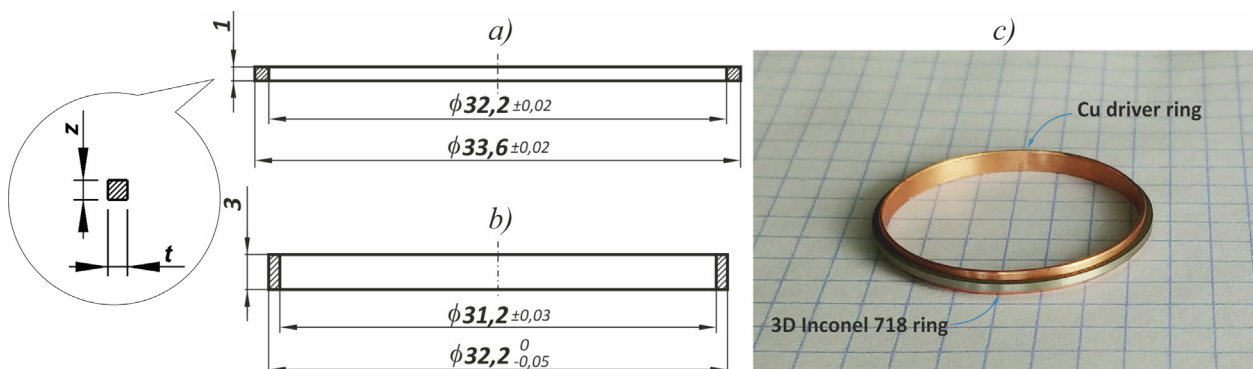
Dimensions of Cu driver ring (a) and assembly of IN718 and Cu driver ring (b) mounted ring samples (c).
